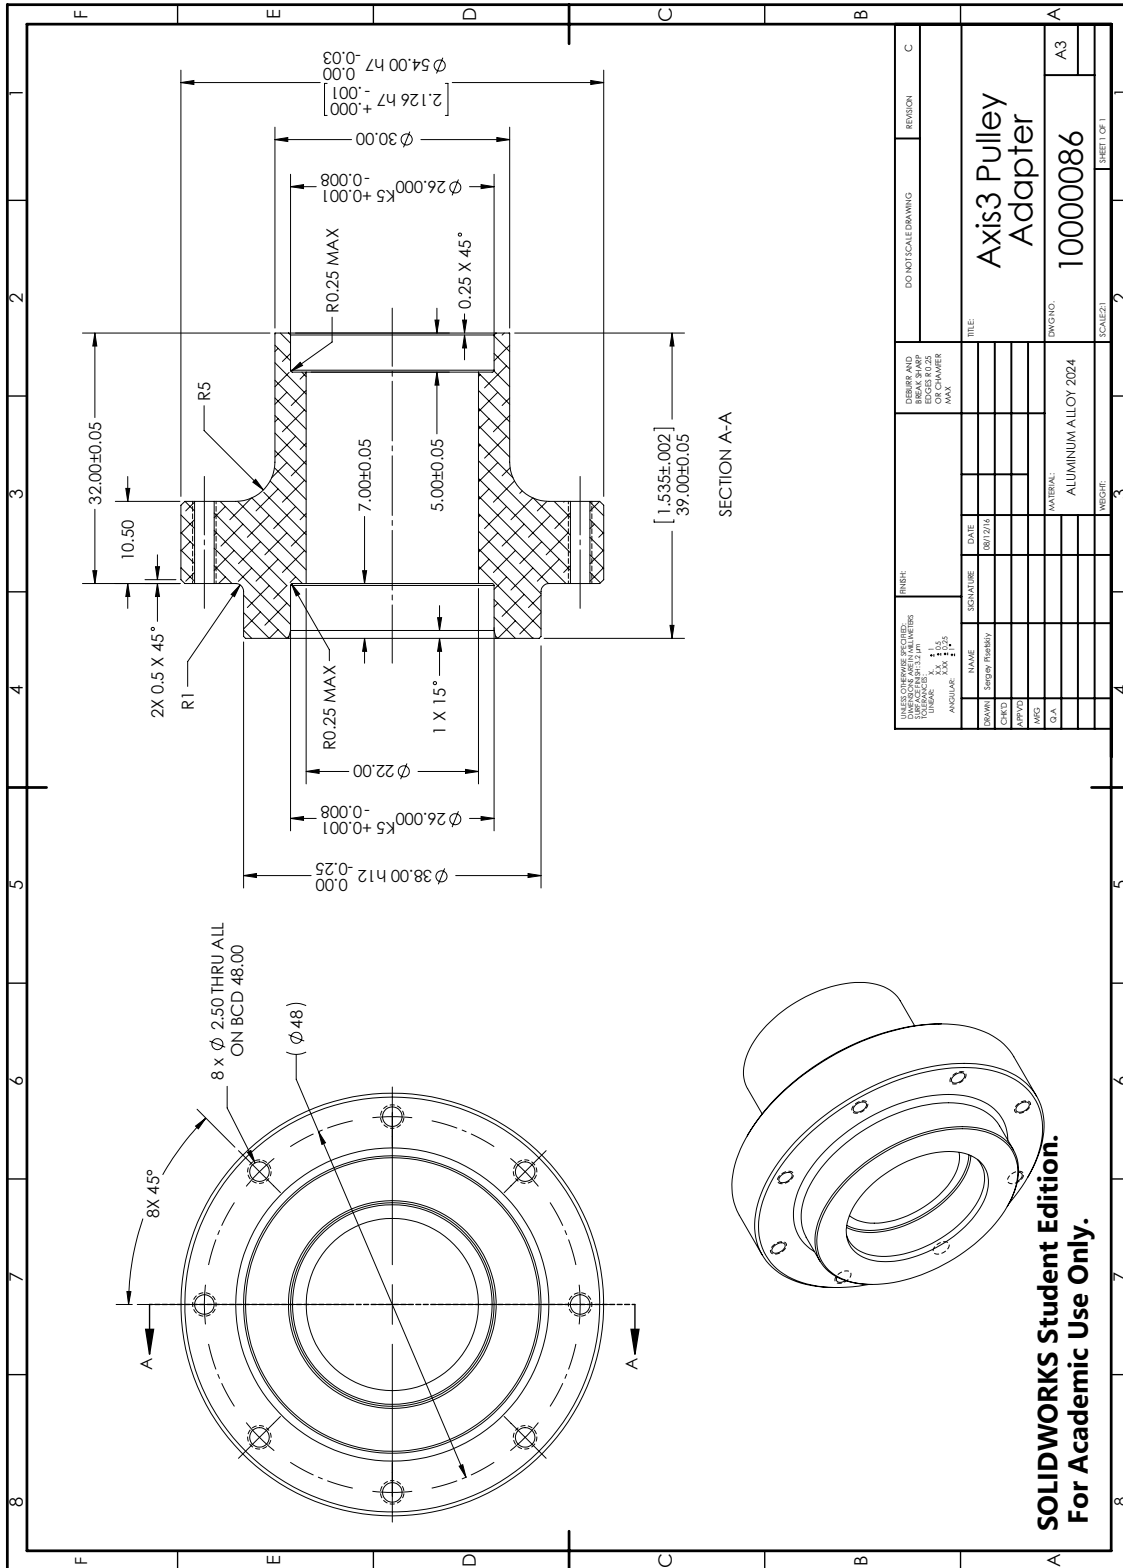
Drawing: Join 3 timing belt pulley adapter.
